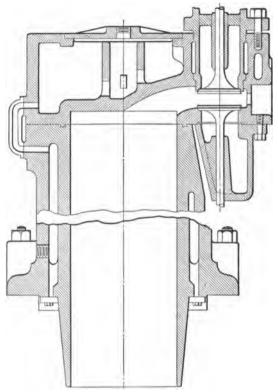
Cylinder for Vertical Multicylinder Gas-engine or Diesel Engine.
